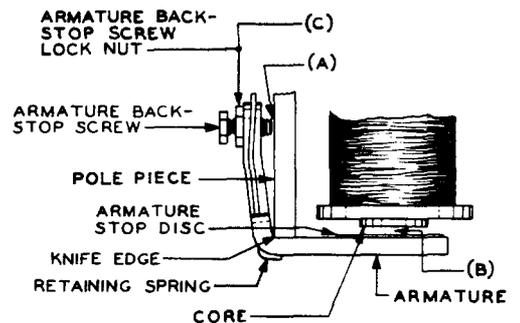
Clearance Between Armature Backstop Screw and Pole Piece
